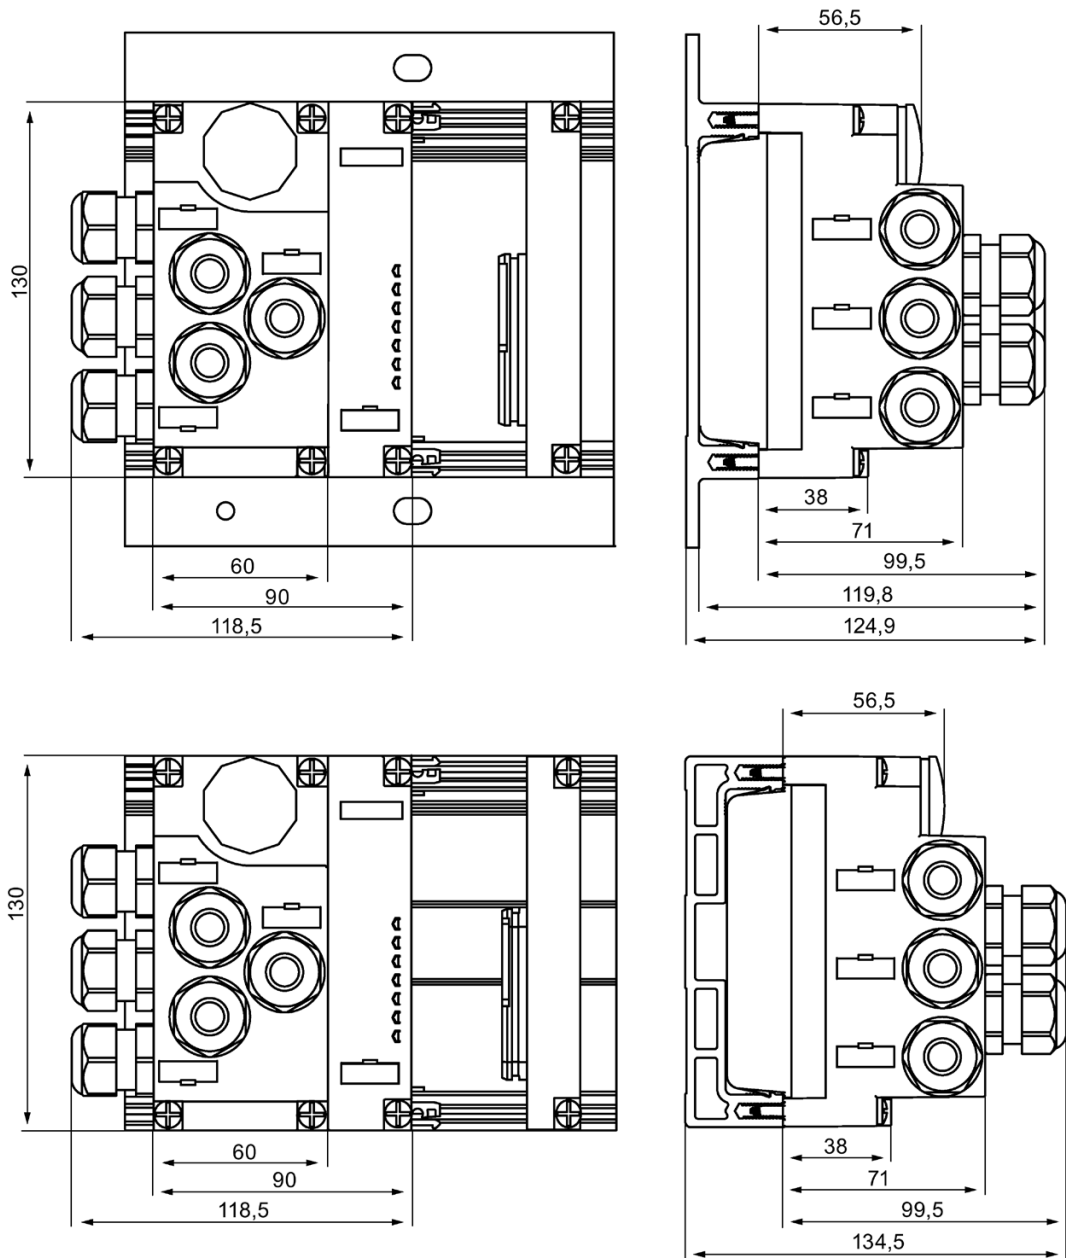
Dimensional drawing of IM 154-1 DP/IM 154-2 DP High Feature interface module with CM IM DP Direct connection module
